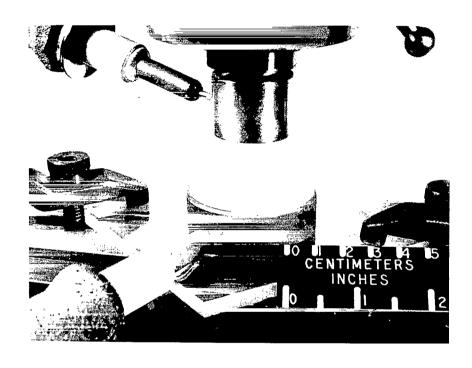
Closeup view of the impression setup. The heated press plate is mounted on the milling machine spindle.
